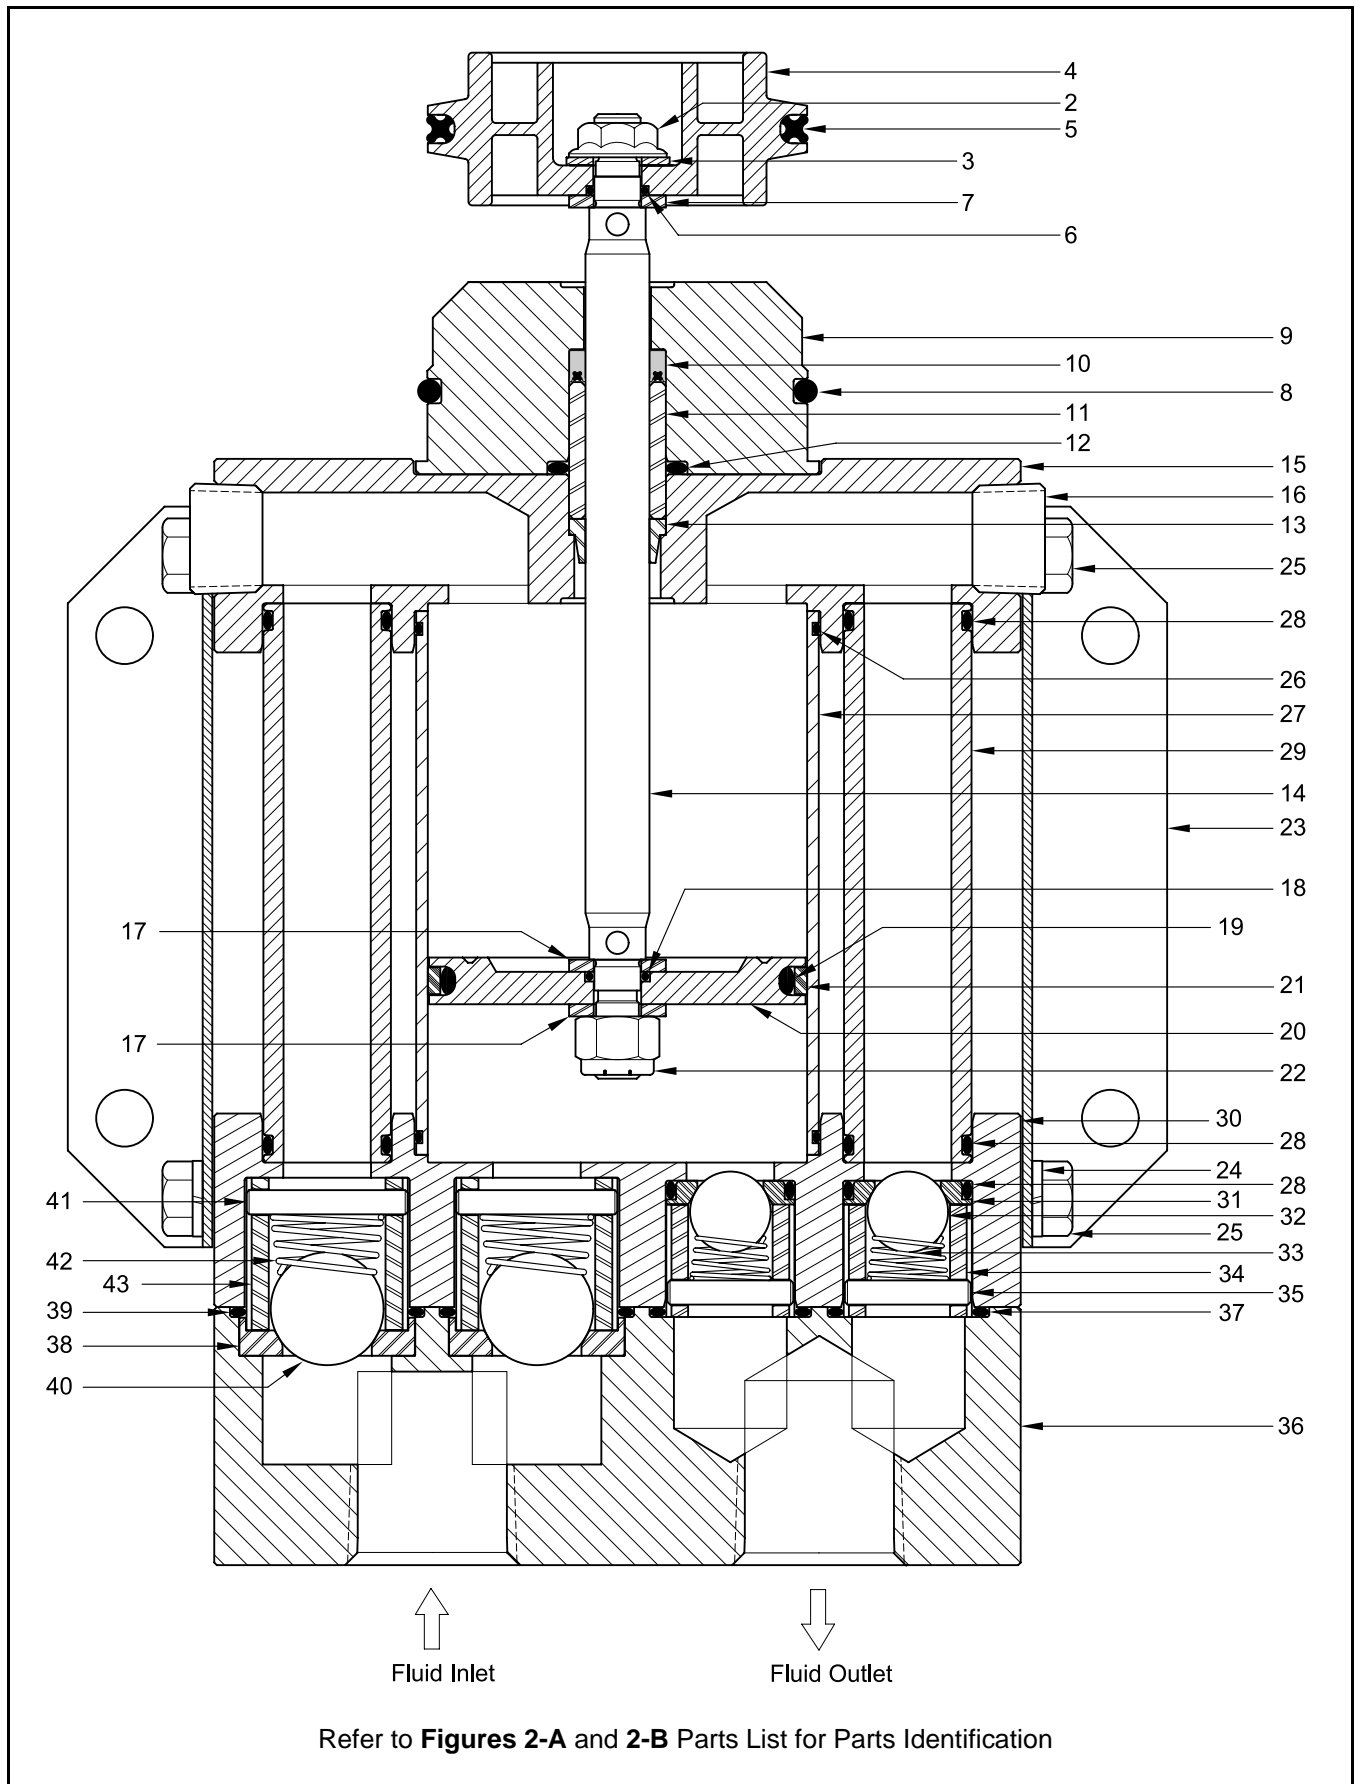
Fluid Evacuation/Transfer Pump (w/o Air Motor) - Section View
